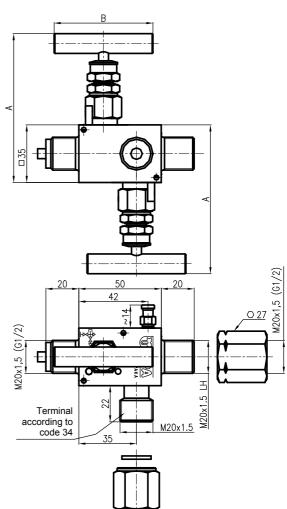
MANOMETRIC VALVE WITH INNER THREADS 967 61 .., dimensional drawing, scheme, application
